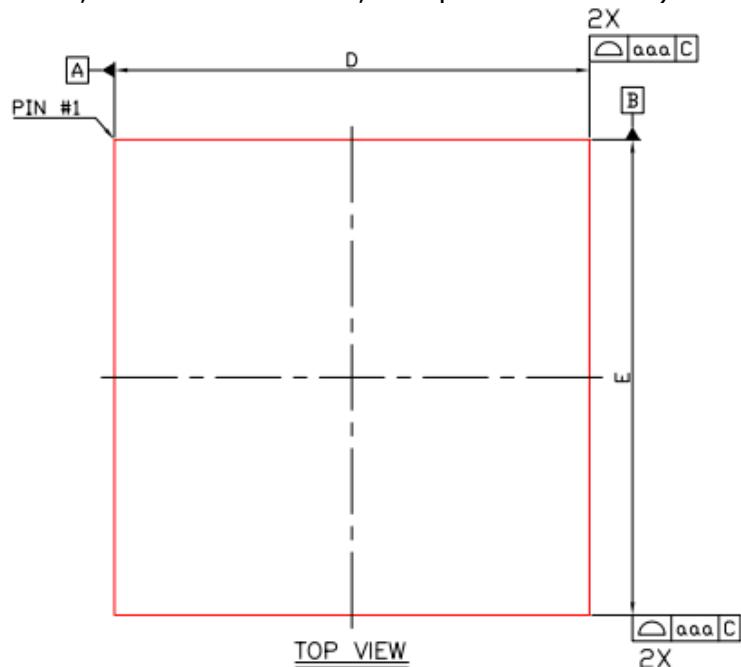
RK618 TFBGA(HF) Package Top View
